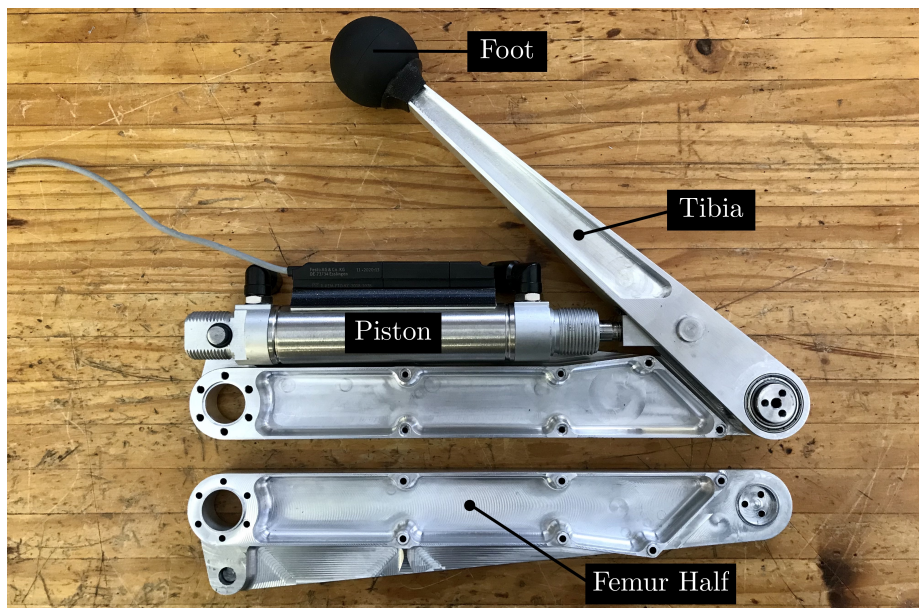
Partially disassembled leg with second femur half removed showing piston closed kinematic chain arrangement.
